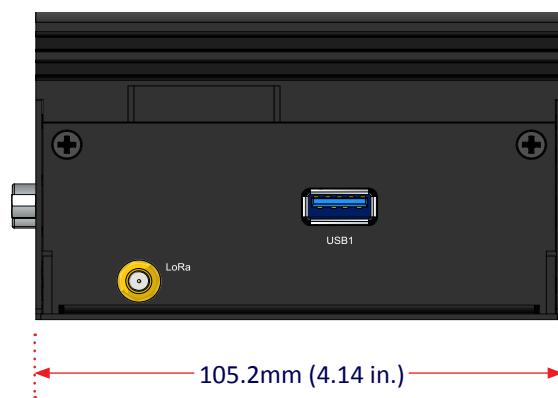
Dimensions of the VIA AMOS-9100 system (left panel I/O)
